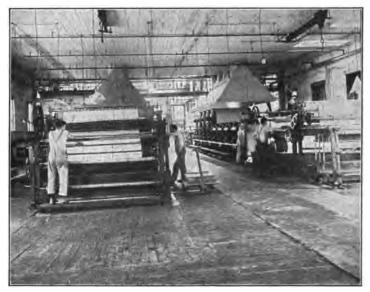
The cutter end of a Fourdrinier paper machine. (Courtesy of B. D. Rising Paper Co.)
